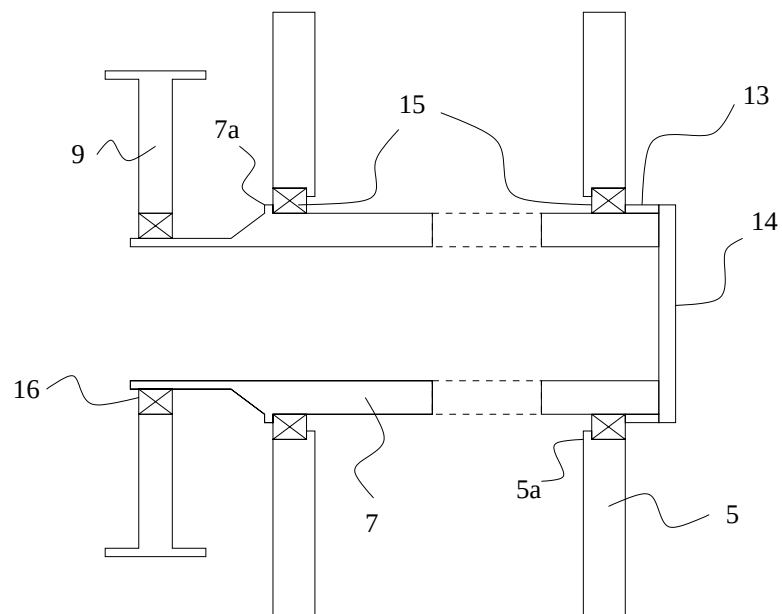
The same bearing configuration was used for all the joints of the arm, the only difference being the sizes of the various tubes. The tube is supported on two angular contact bearings (15). These are preloaded by shoulders on the tube (7a), shoulders on the supports (5a), a spacer (13) and a lock ring (14). The bearings are far apart, and can withstand axial and radial loads between the tube and the supporting structure. The pulley (9) needs to move relative to the tube to accommodate deflections in the spring. It does not have large axial or radial loads, so it is supported on a radial bearing.
